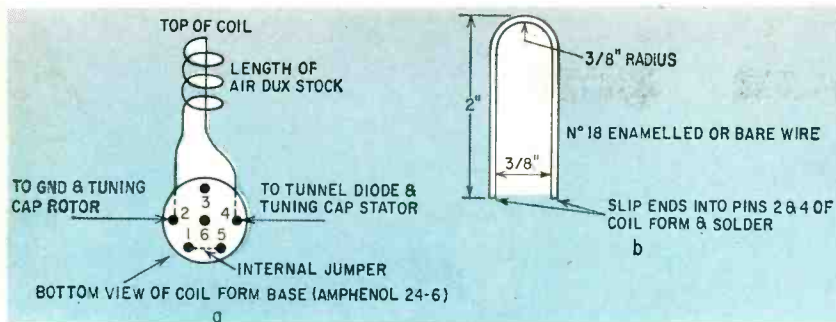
Details of dip-meter coils: a—coils B, C and D; b—coil E.
